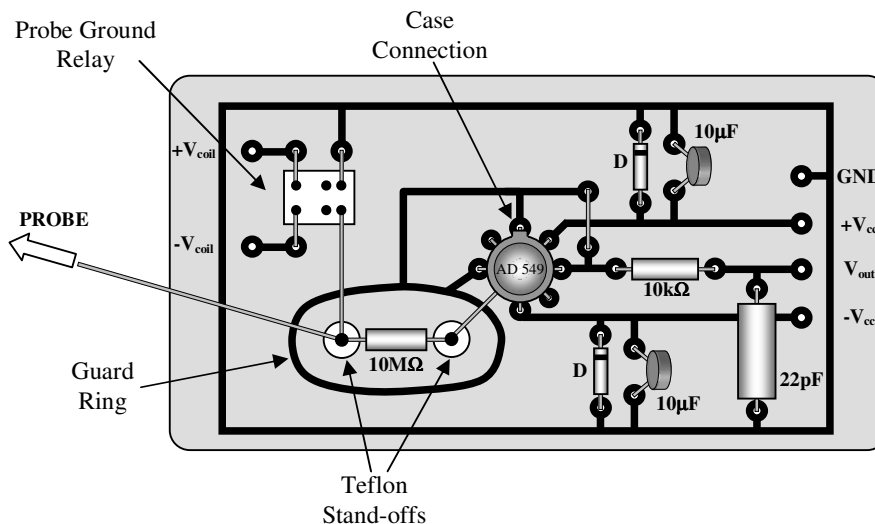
Printed Circuit Board layout for the probe buffer circuit.
